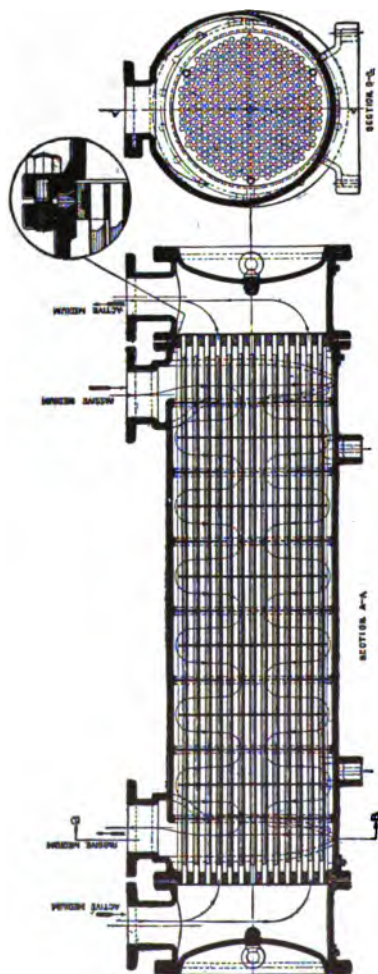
SEC. 8a.—Sectional view of an oil cooler, manufactured by the Schutte & Koerting Company.
